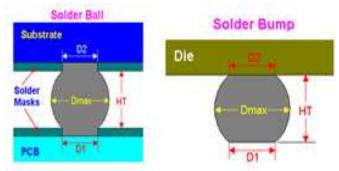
Specifying technology parametersincludes bump/ball geometry) for package extraction.
